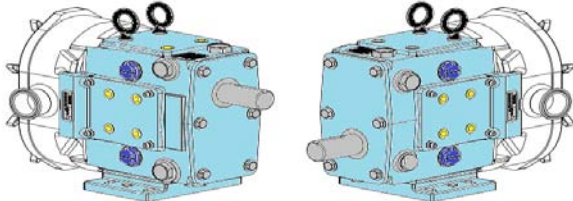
Upper Shaft Mount and Lower Shaft Mount
